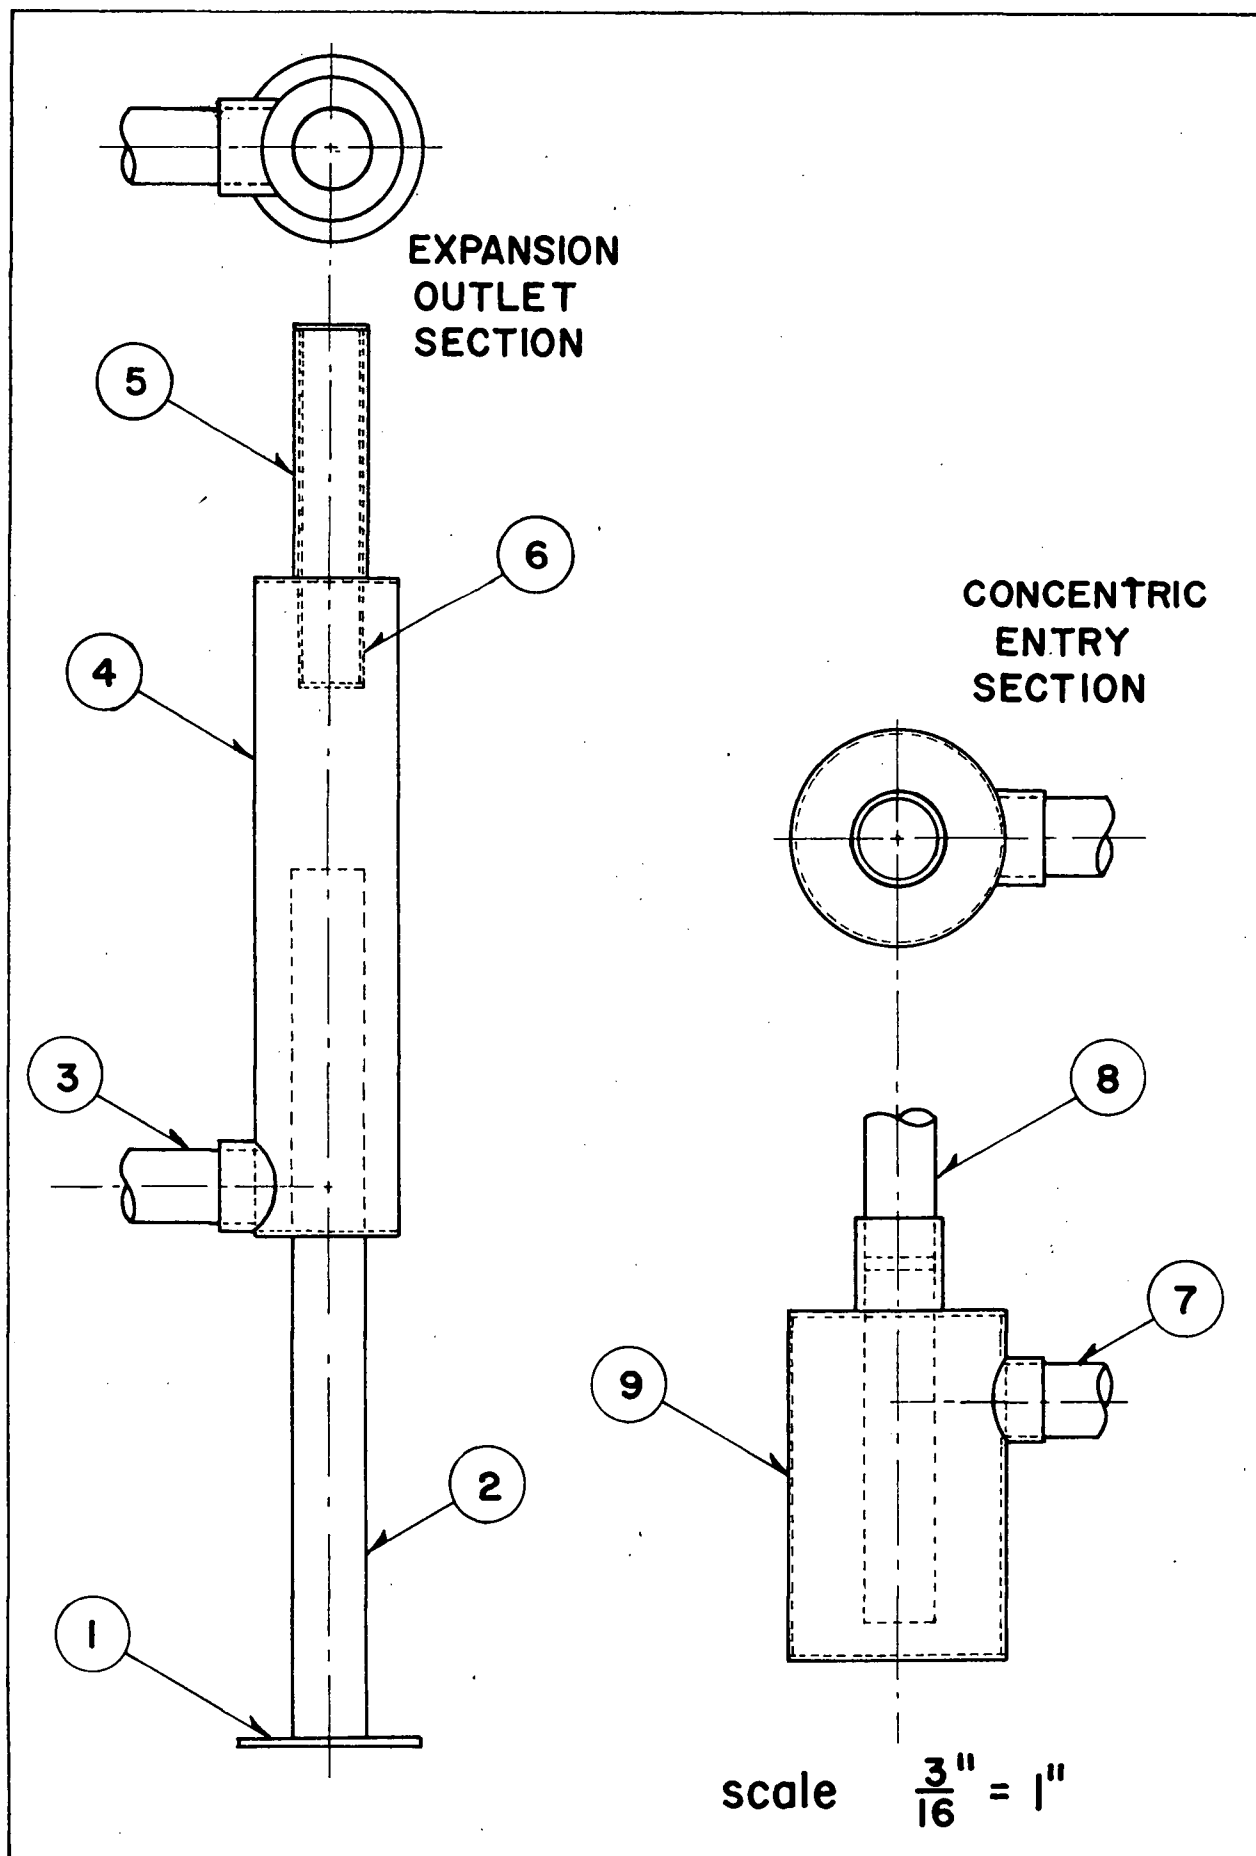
Diagram of Entry Section to and Exit Section from Column.
